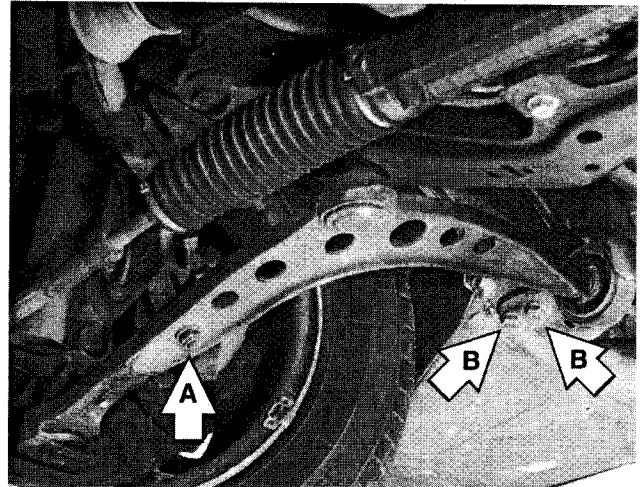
Stabilizer bar link nut (A) and control arm bushing carrier bolts (B). Right side shown.
